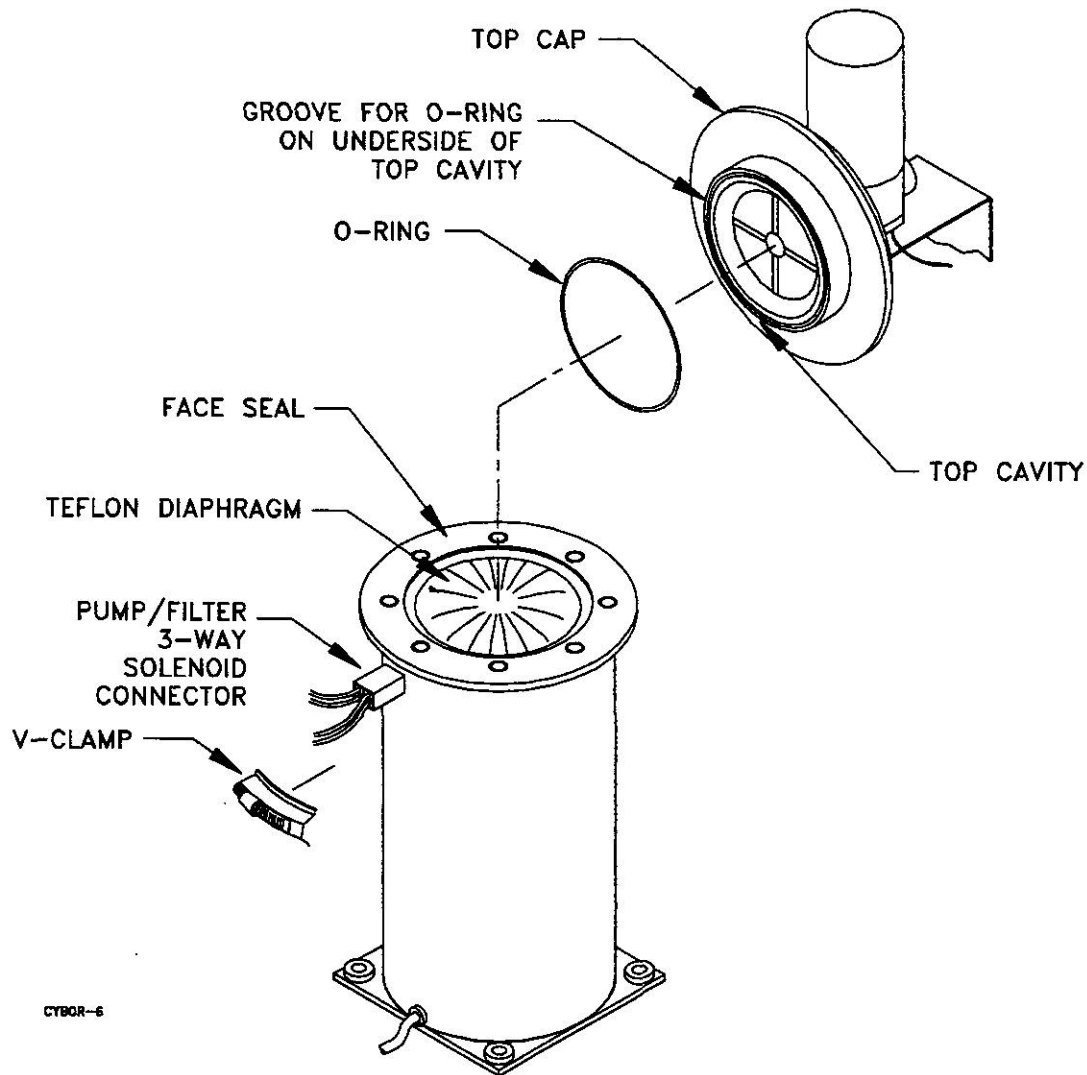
Top Cap Assembly O-Ring Removal and Replacement
